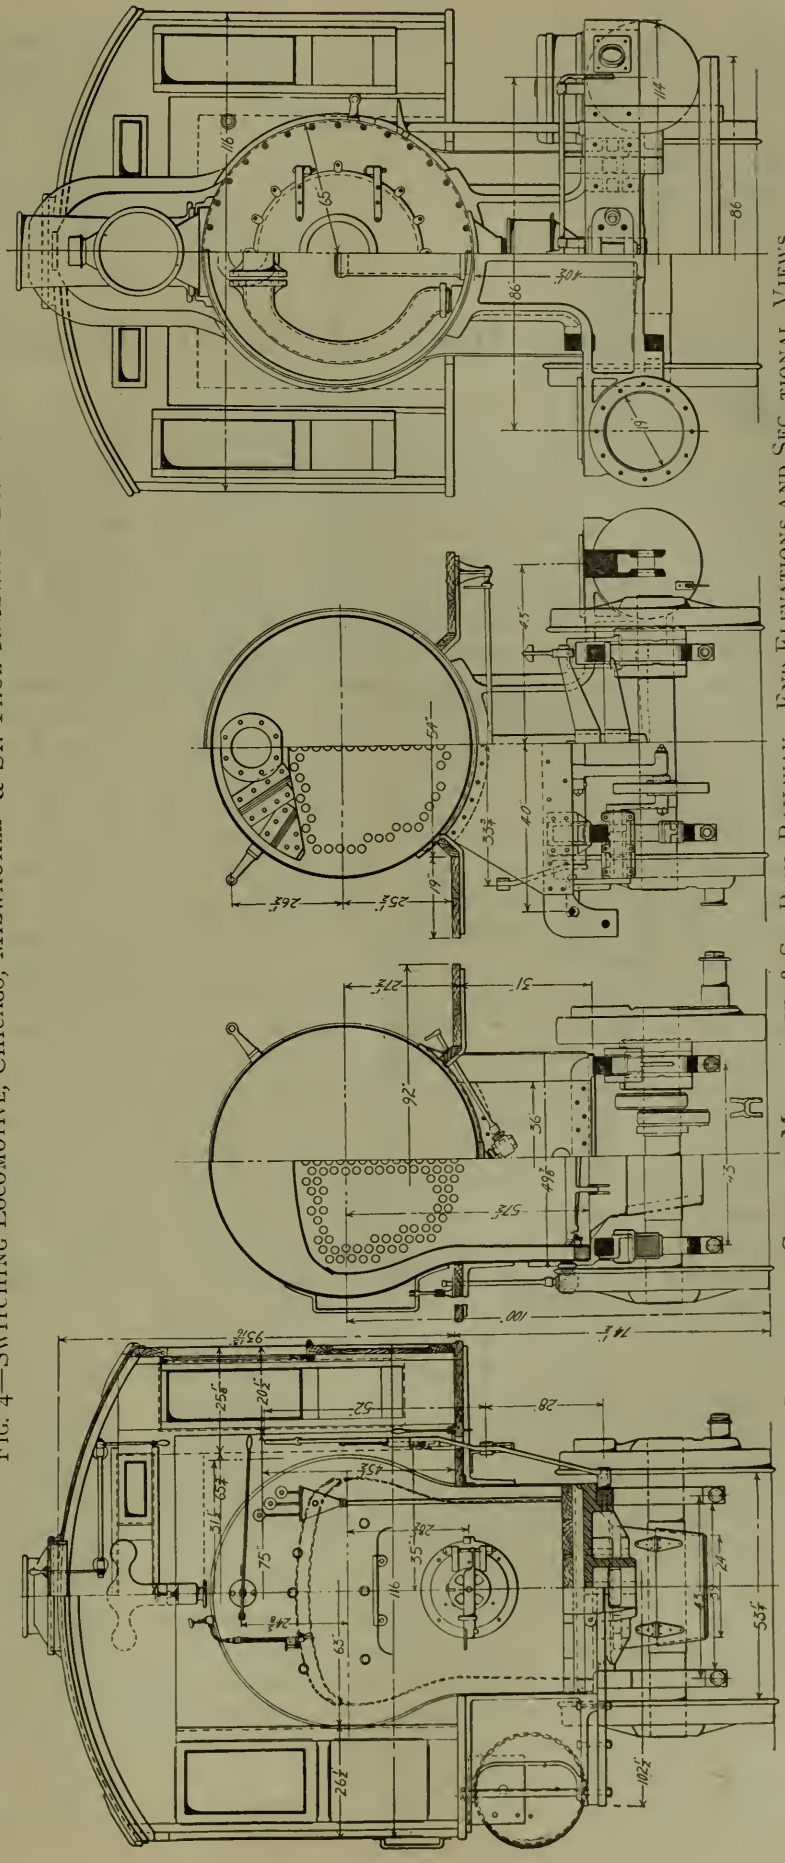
SWITCHING LOCOMOTIVE, CHICAGO, MILWAUKEE & ST. PAUL RAILWAY—END ELEVATIONS AND SECTIONAL VIEWS.
